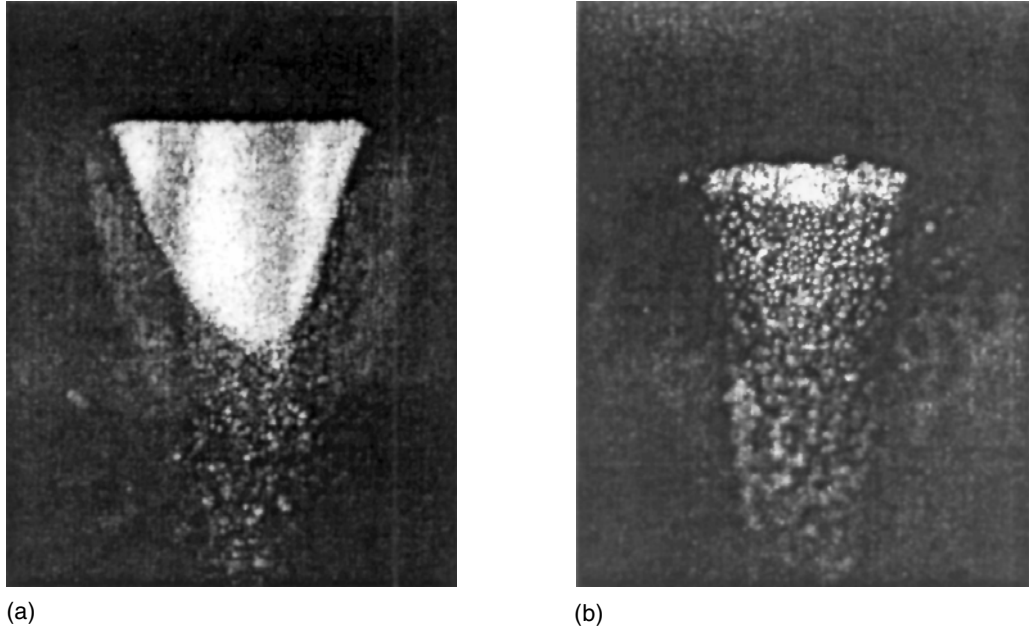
Extent of wear damage on (a) uncoated and (b) nanocrystalline diamond coated tool inserts after machining of hypereutectic aluminum-silicon alloy.
